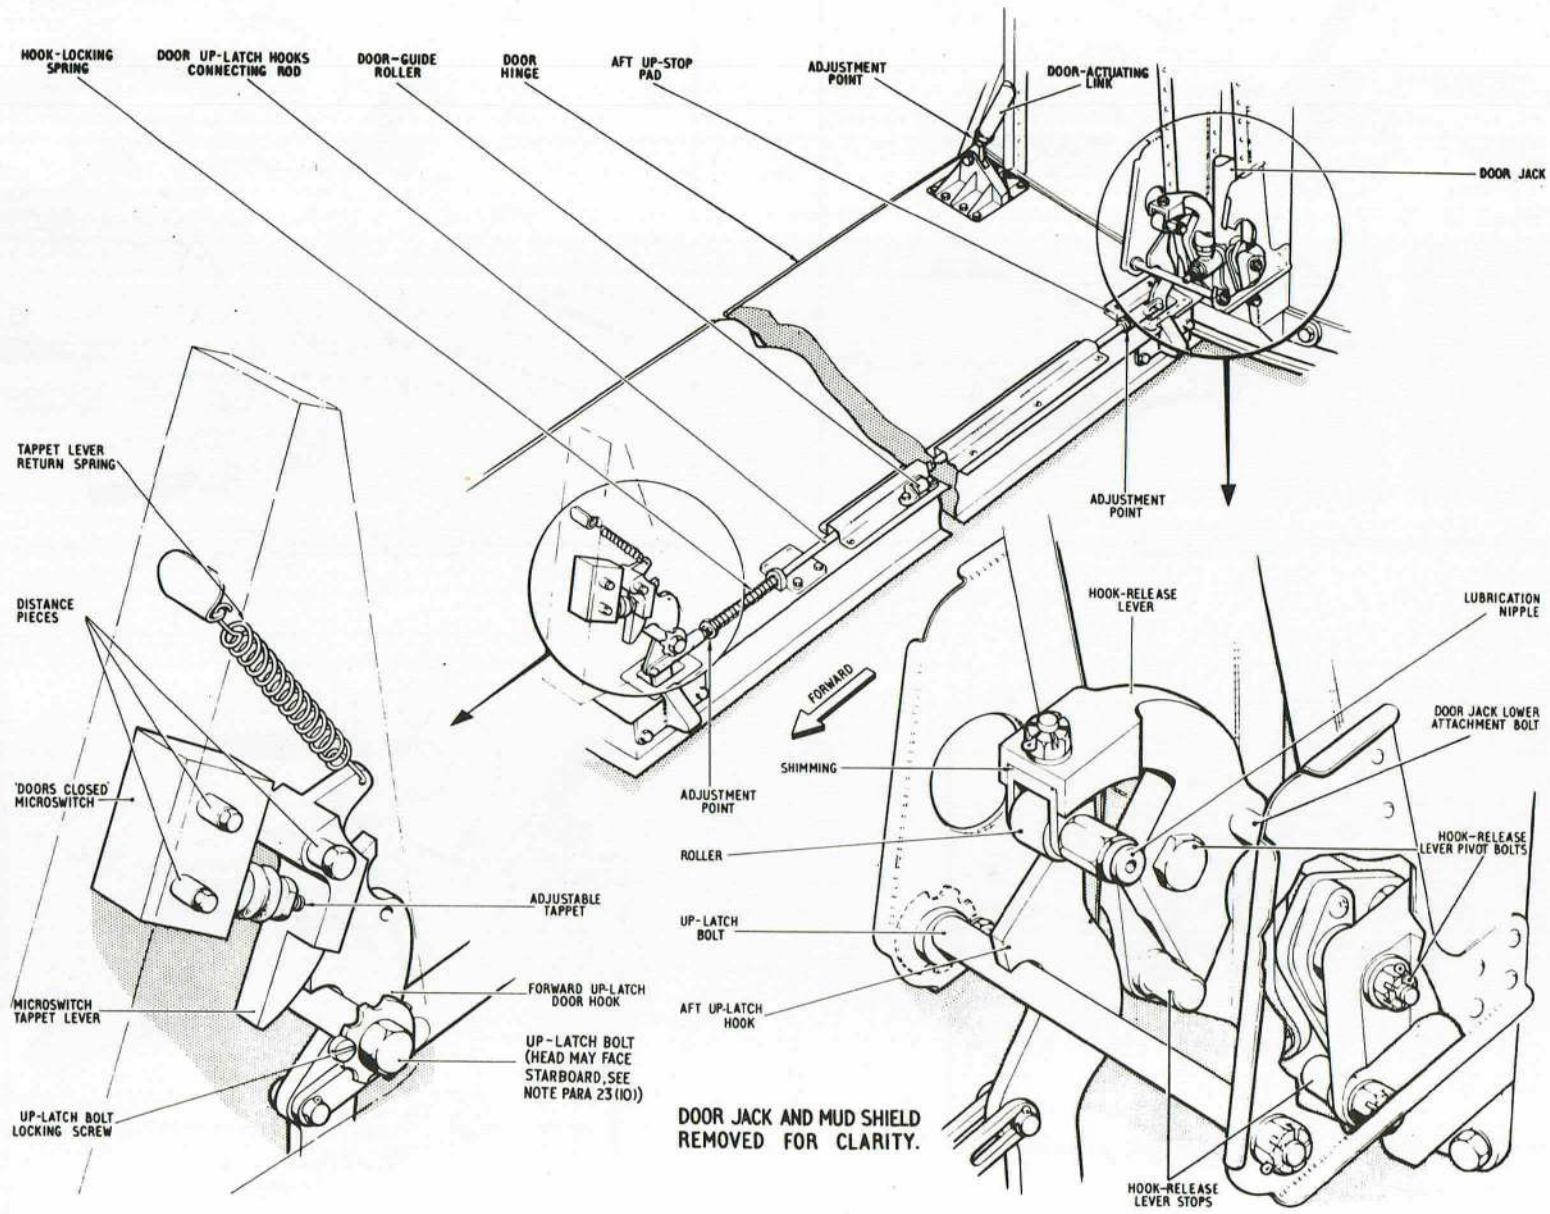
STARBOARD DOOR LOCKING MECHANISM
